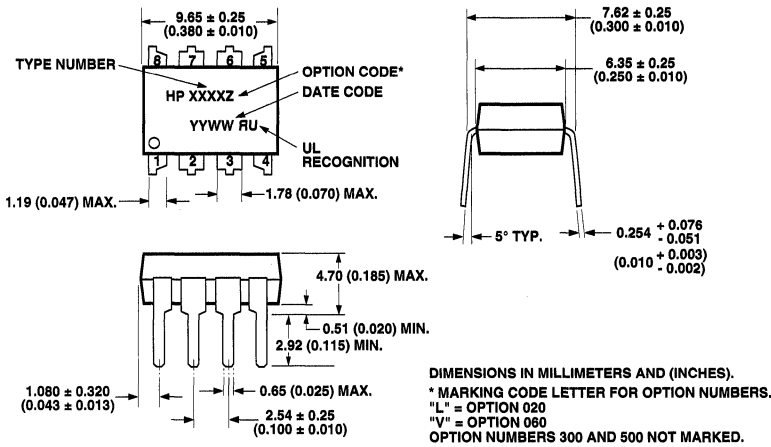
HCPL-4506 Outline Drawing (Standard DIP Package).
